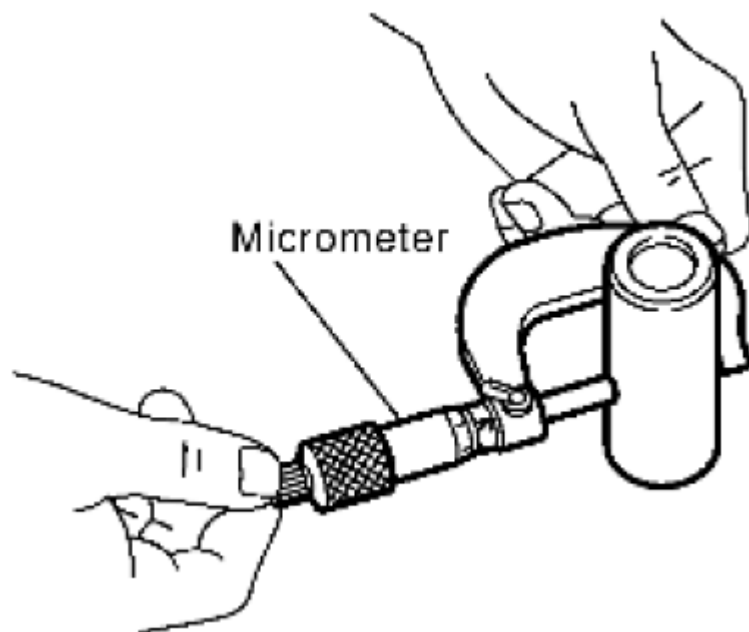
Measuring Diameter Of Piston Pin Using Suitable Tool
